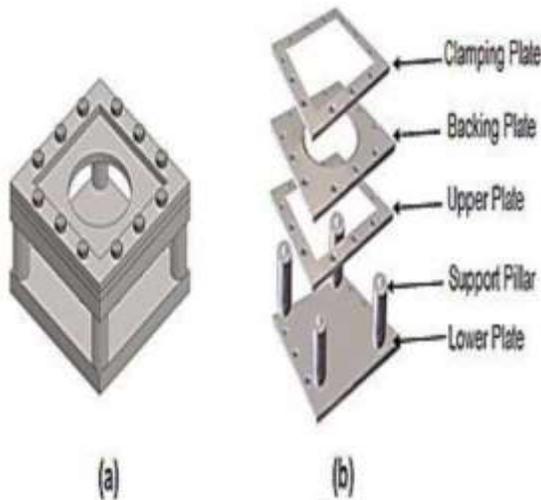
Clamping Arrangement, a-Assembled b-Disassembled
